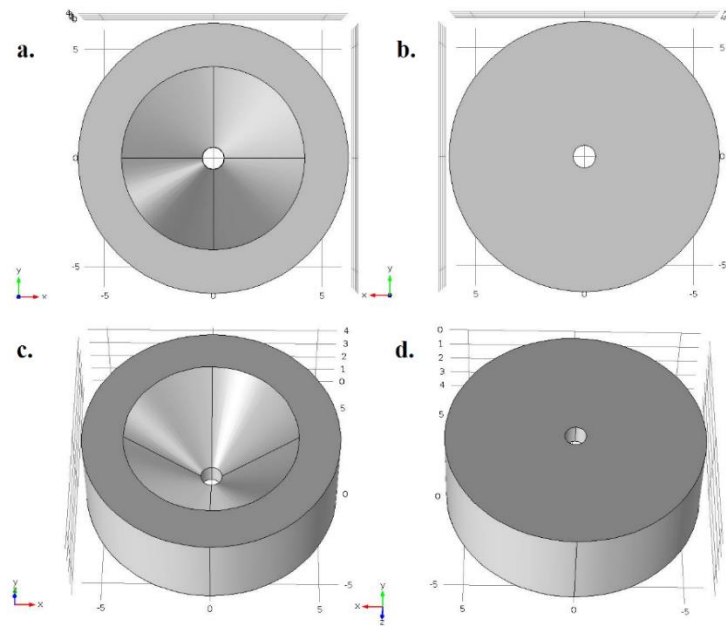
Schematic illustrations of top and bottom views of lower part of prototype 6, (a. top view, b. bottom view, c. inclined top view, d. inclined bottom view)
